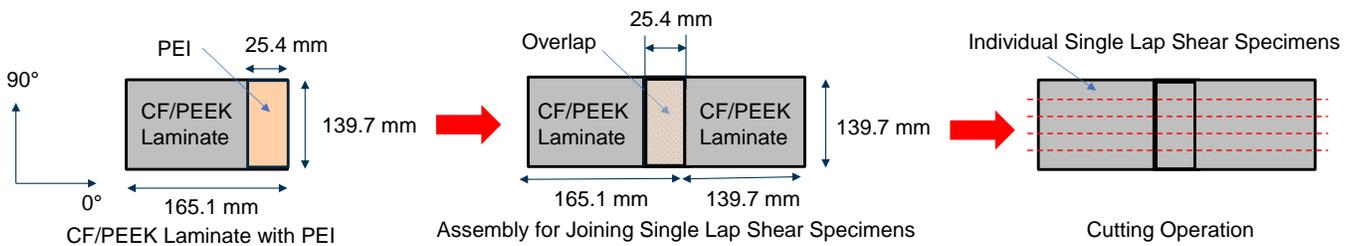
Schematic showing the preparation of the specimens used for the single-lap shear specimens
